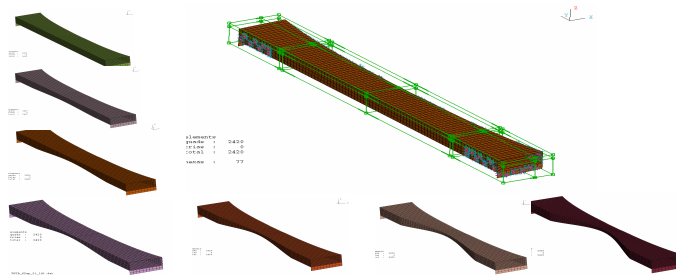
Using Morphing Techniques to Modify the Shape of the Crossmember
